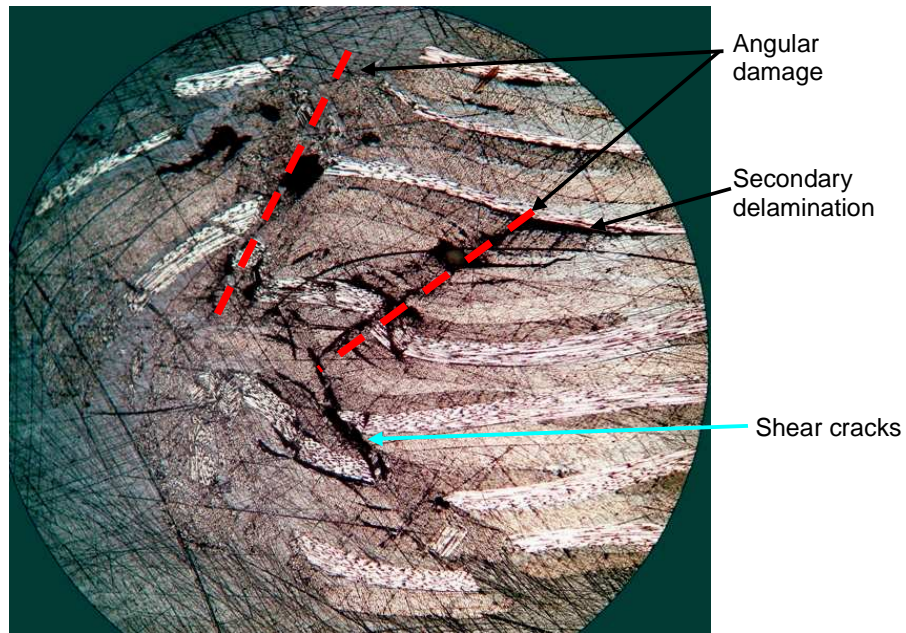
Damaged upper laminate at 0° section for joints with 220 μm clearance
